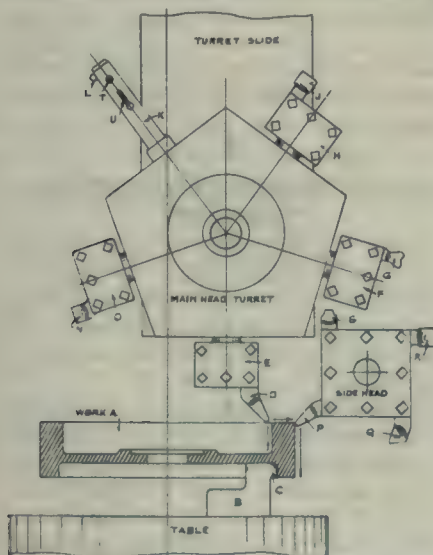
TOOL LAYOUT FOR FIRST SETTING.
